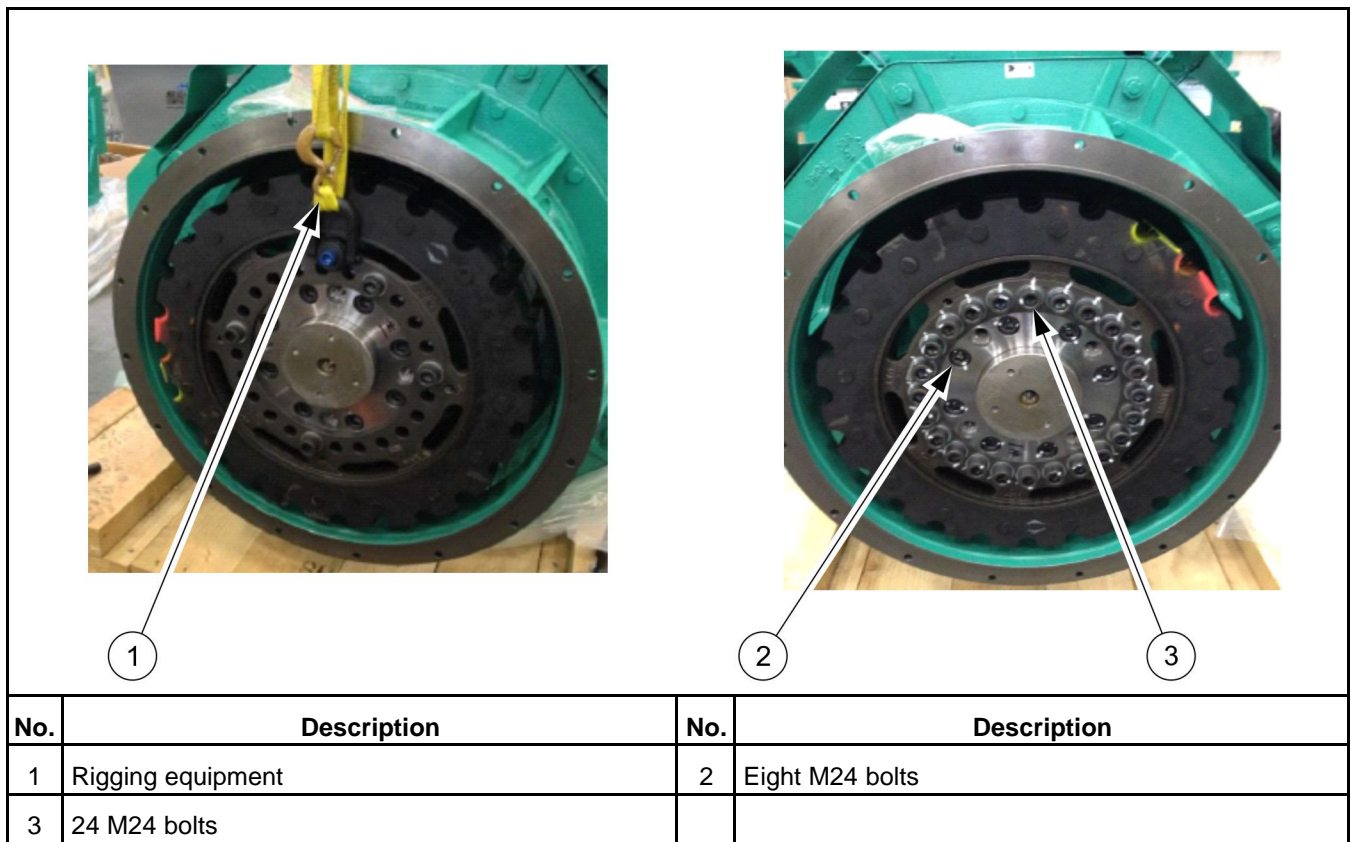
RIGGING EQUIPMENT AND BOLTS
